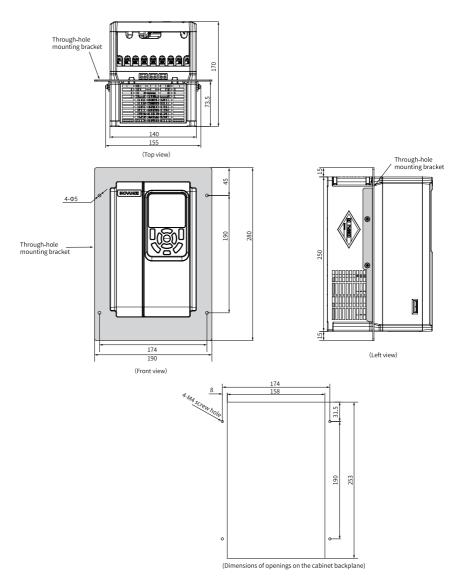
MD500-AZJ-A1T3 through-hole mounting bracket and hole dimensions (mm)
